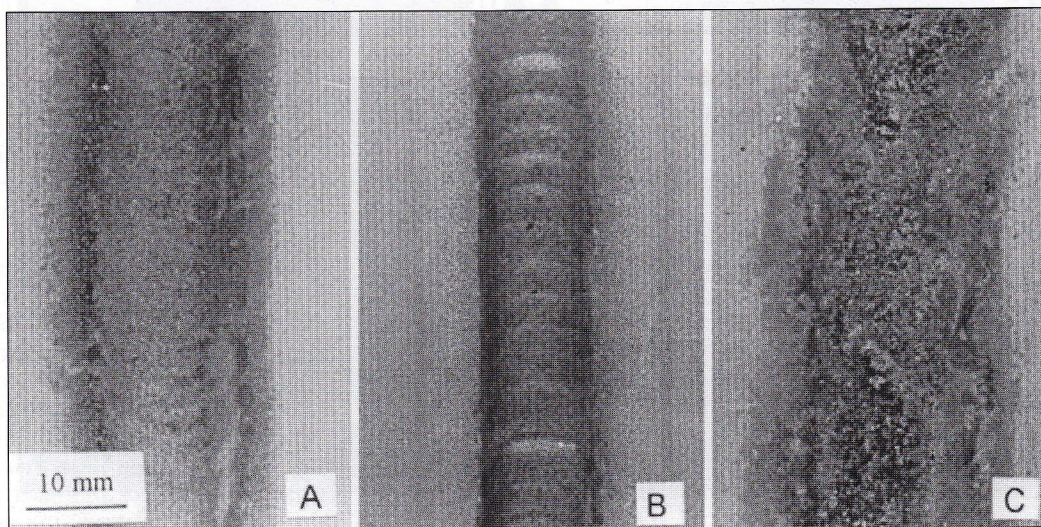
Macroscopic views of plate-to-plate weld beads.
